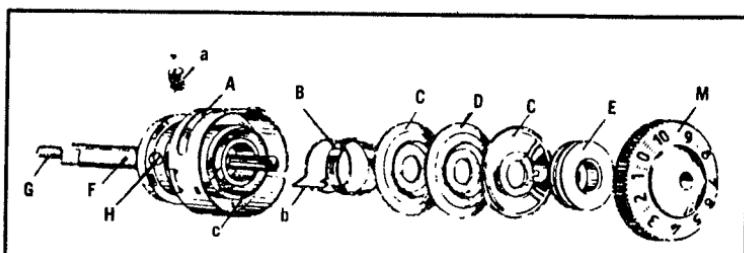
This is the top tension mechanism on Models 260 and 360. a. Set screw; b. Thread check spring loop; c. Thread check spring regulator; A. Tension barrel; B. Thread check spring; C. Tension discs; D. Central tension disc; E. Tension spring, w/ spring assembly; F. Tension stud; G. Tension release plunger; H. Set screw; and M. Tension dial.
